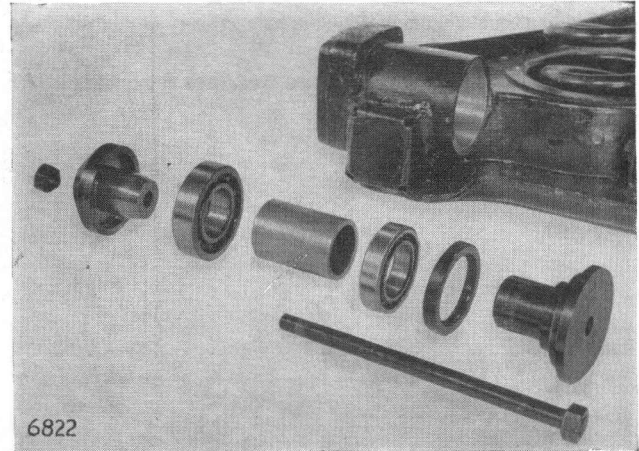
Rear hub showing assembly of Tool No. RG.379
